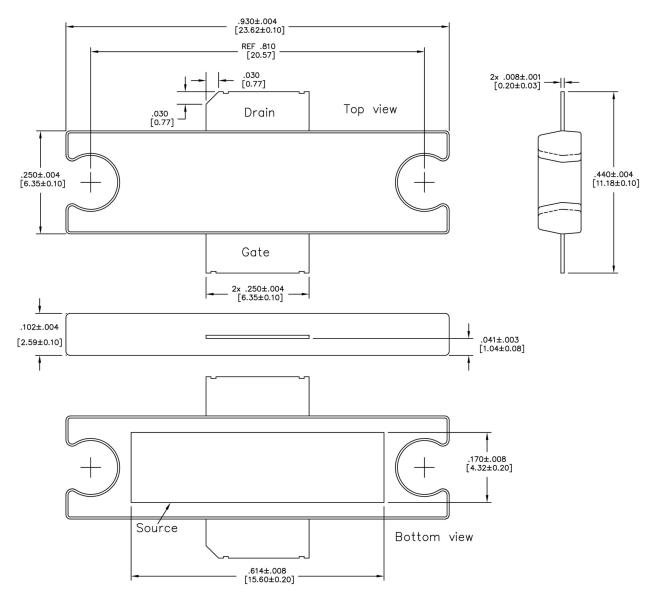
TO272-2 Bolt-Down Plastic Package Dimensions (all dimensions in inches [millimeters])
